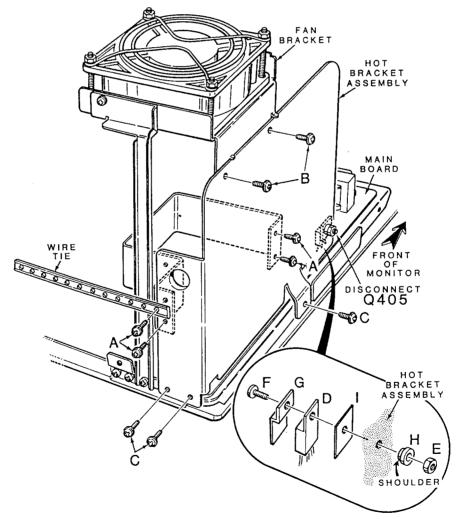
HOT Bracket Assembly Screws and Disconnecting Q405
